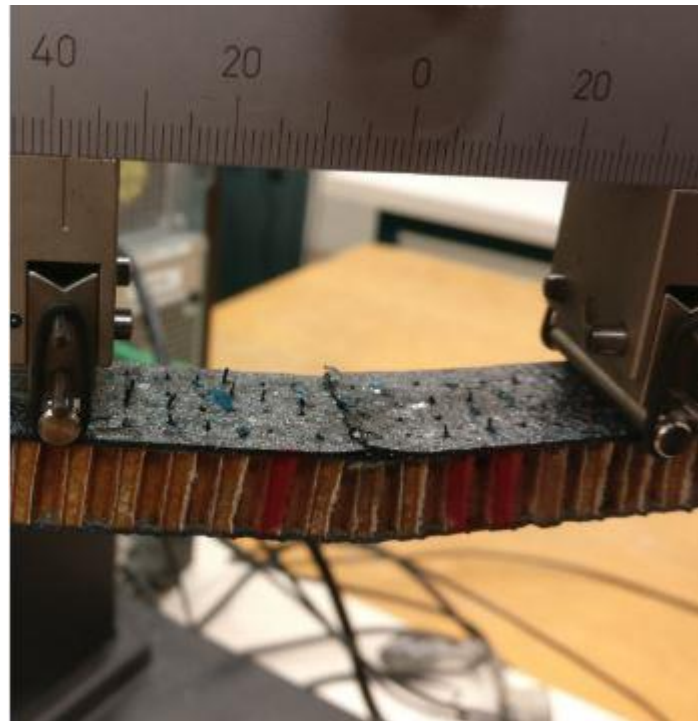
Surface failure below upper roller and damage to core in disbonded specimen after TTR repair
